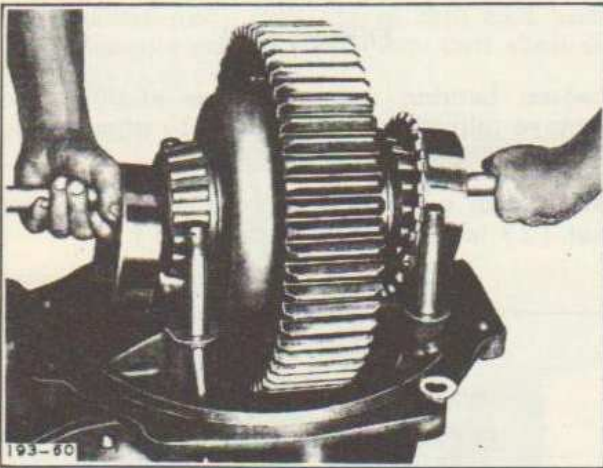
Removing Differential and Spur Gear Assembly from Housing
